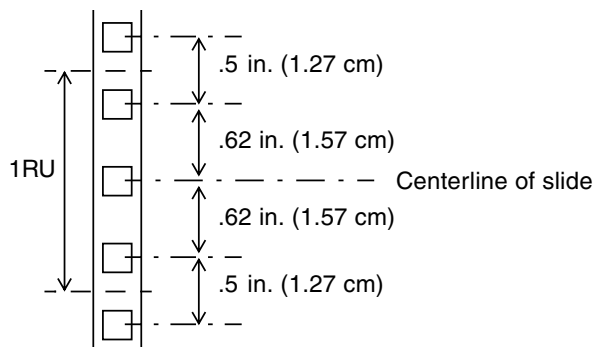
EIA/RETMA Universal Mounting Hole Pattern Dimensions
